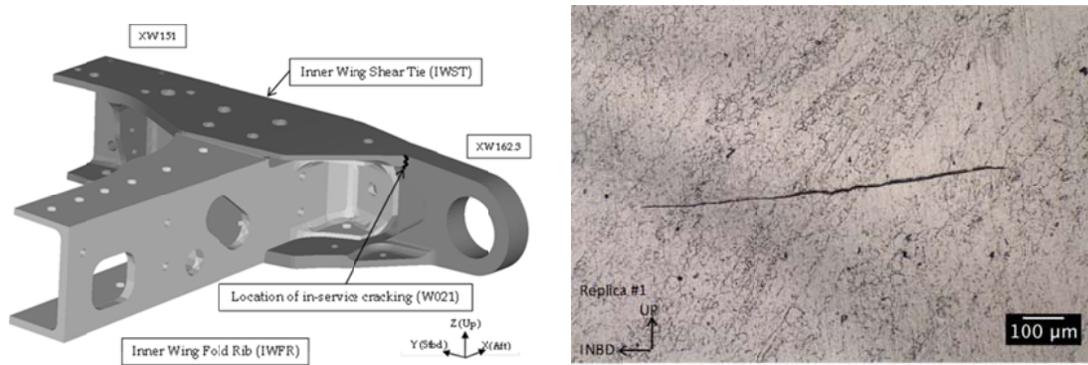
The inner wing aft spar upper flange shear tie radius location (left), and a replica inspection of the 're-cracked' condition of the location prior to shape optimised blend repair (right).
